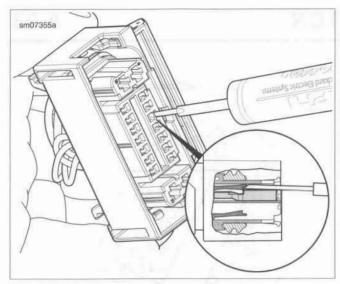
Removing Small Socket Terminal: Tyco MCP Connector
